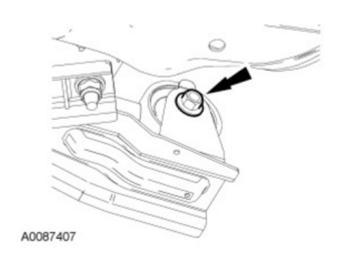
Locating Transaxle-To-Engine Bolts Courtesy of FORD MOTOR CO.
